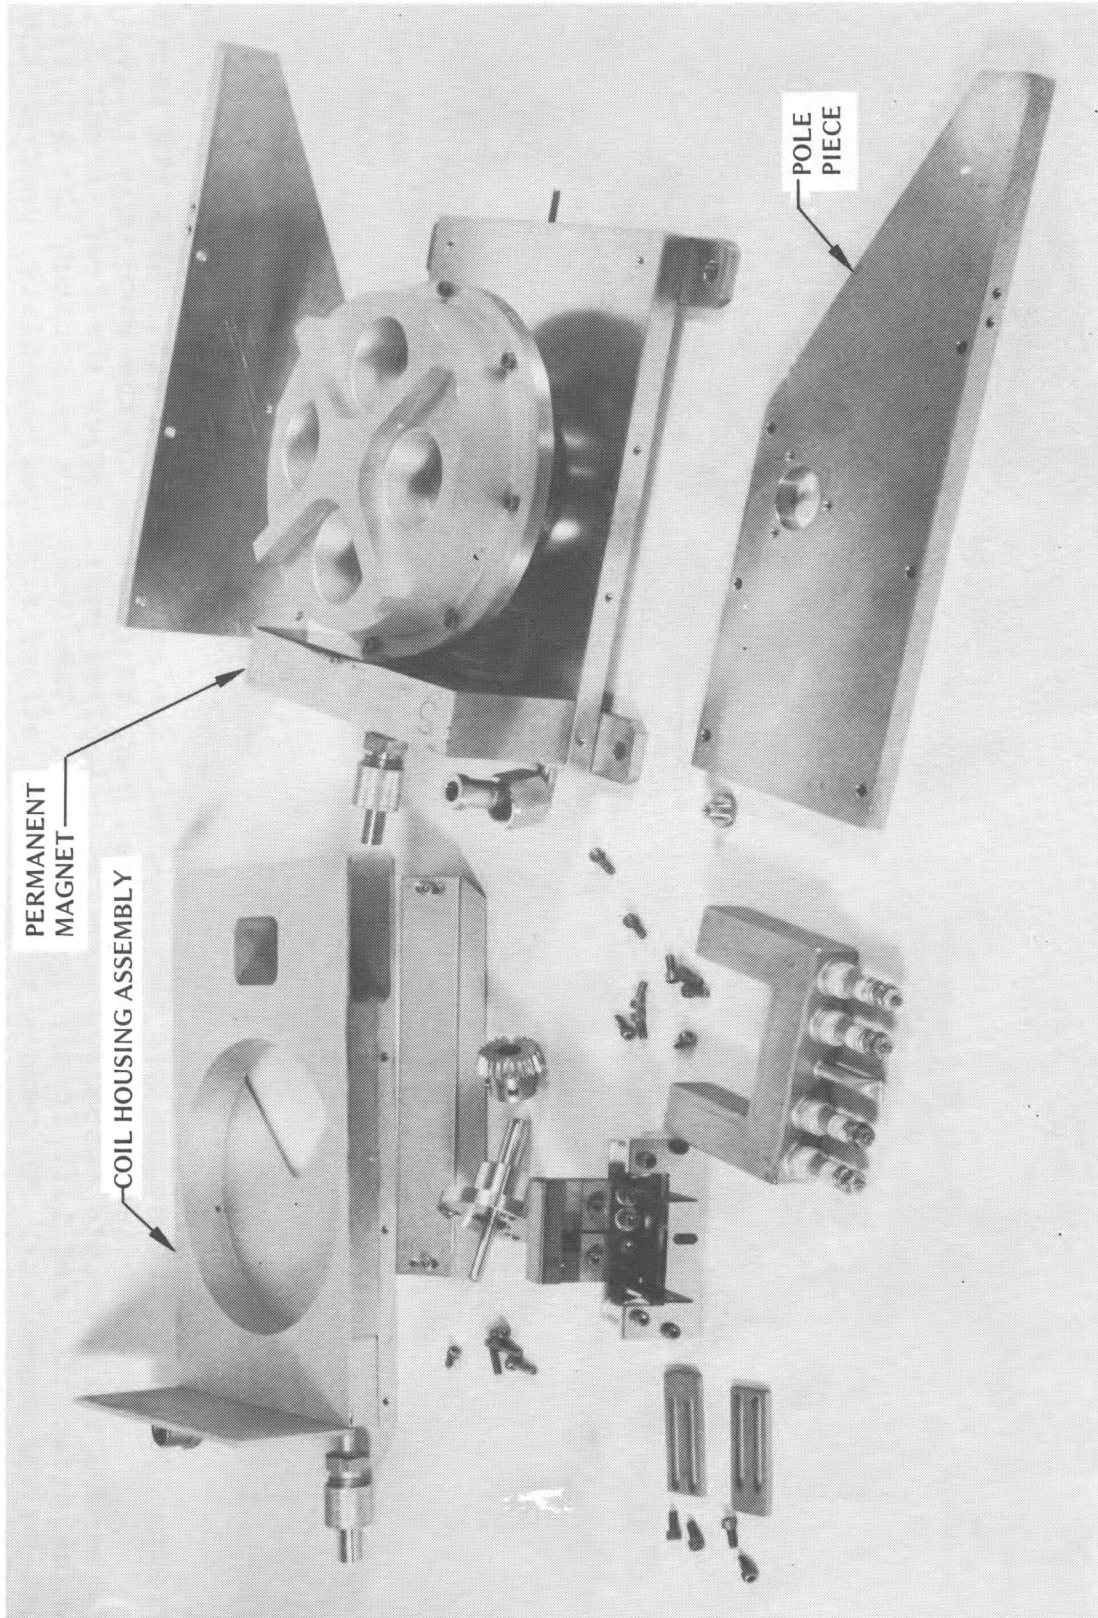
Grasp the coil assembly firmly and pull it straight out of the coil assembly housing. Then unscrew the pole piece extension mounting screws and remove the pole piece extensions.
